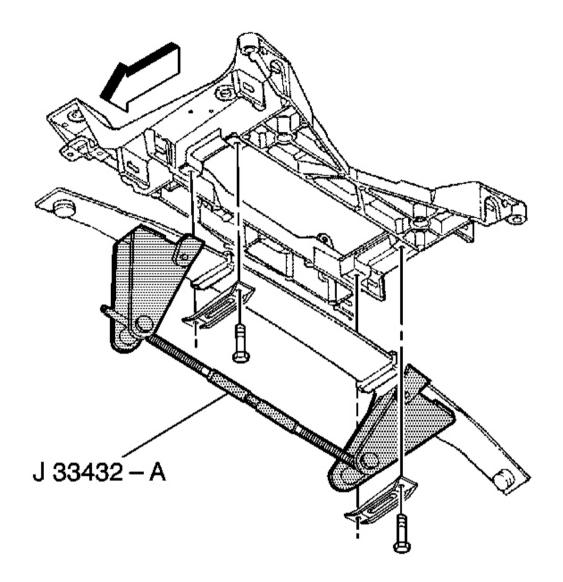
Using J 33432-A Courtesy of GENERAL MOTORS CORP.
